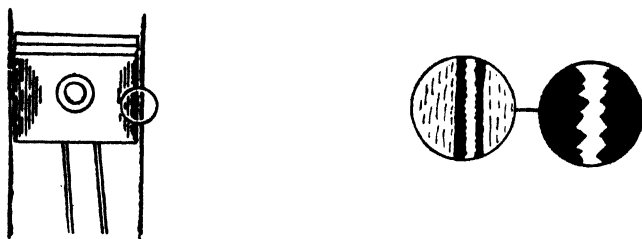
Sketch of piston and cylinder, showing peaks left by the machining processes, which have to be dispelled during the "running in" period.
